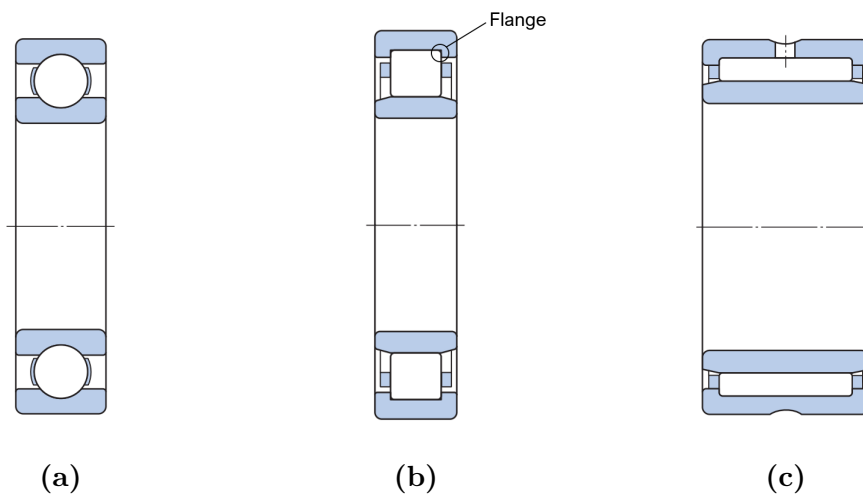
Illustration of different rolling bearing designs: a) Single row deep groove ball bearing. b) Single row cylindrical roller bearing. c) Single row needle roller bearing.
